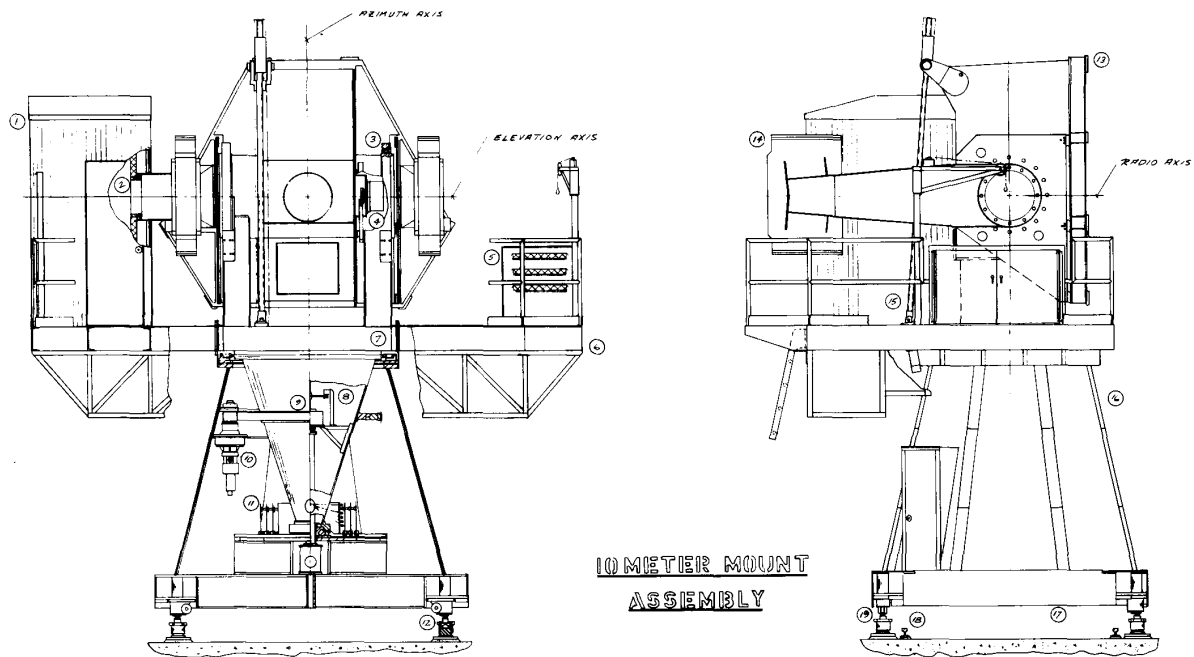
Drawing of the telescope mount. Key: 1) receiver room, 2) receiver plate, 3) elevation bearing, 4) elevation encoder, 5) helium compressor for 4 K closed-cycle refrigerators, 6) compressor platform, 7) alidade platform, 8) tiltmeters, 9) azimuth encoder, 10) azimuth drive motors, 11) azimuth cable wrap, 12) tie-down nuts, 13) reflector mounting platform, 14) counter weight, 15) elevation drive ball screw, 16) insulated pedestal, 17) clearance for antenna transporter, 18) transporter rails, 19) positioning peep sight.
